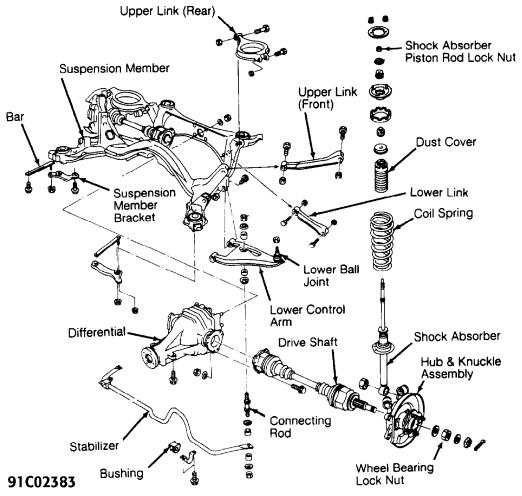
Exploded View of 240SX Rear Suspension Courtesy of Nissan Motor Co., U.S.A.
